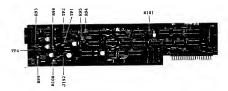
Locations of adjustments on the YIG Oscillator I/O board (BGR-010219)
